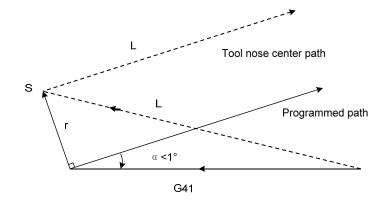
Linear—linear ($\alpha < 1^\circ$, starting tool outside)
